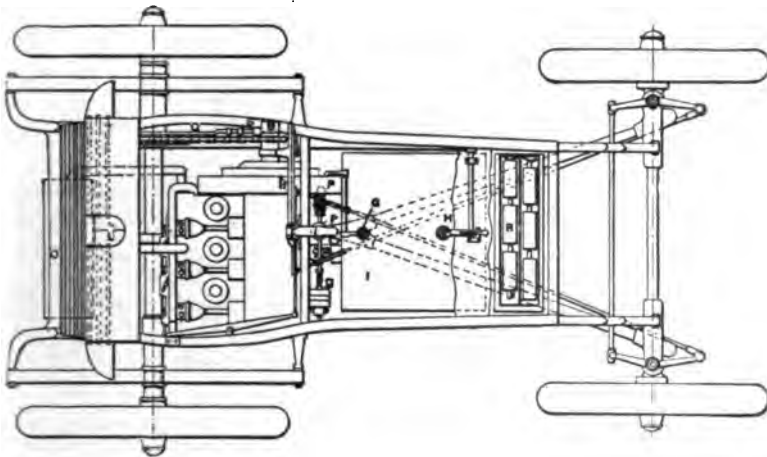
Plan View of Duryea Three-cylinder Car. B, bearing for speed gear; C, distance-rod from rear axle for taking up the pull of the chain; D, the magneto-generator; G, pedal for operating the reverse clutch; H, brake pedal; I, gasoline tank; P, central single control lever; R, 6-cell battery. Front axle shorter than rear to prevent skidding and promote ease in turning.
